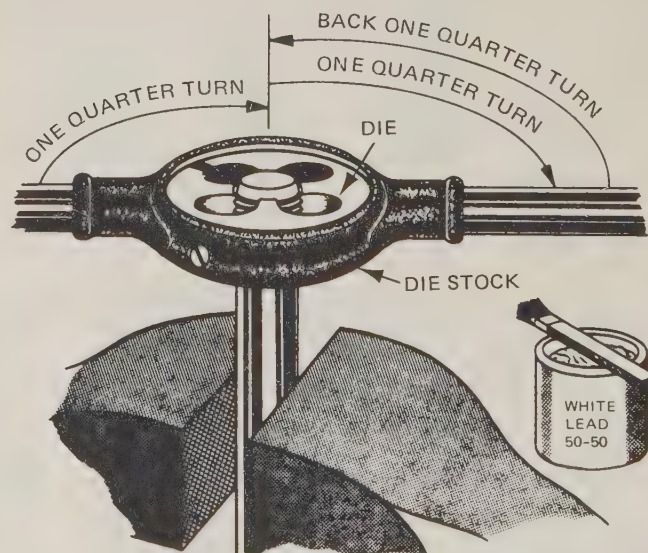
To use a die properly, turn it ahead one-half turn, then back one-quarter turn, while keeping the threads coated with lubricant.
